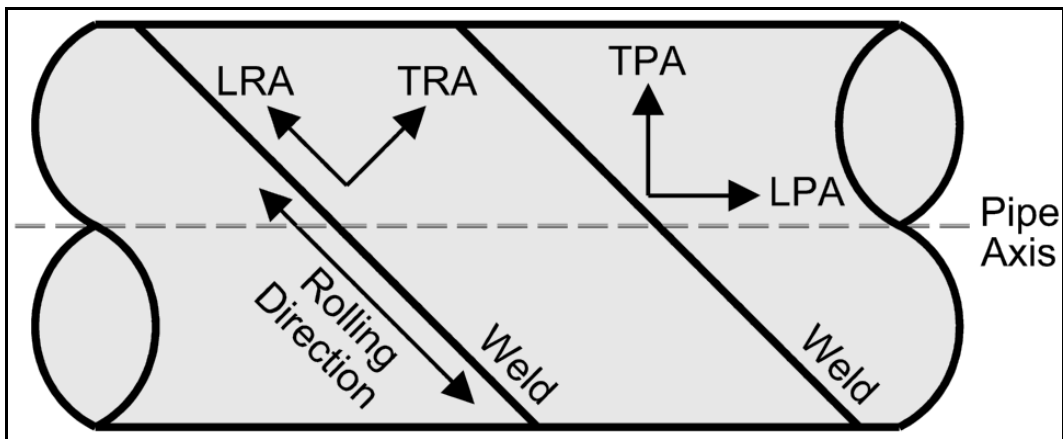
Pipe Specimen Orientations (Adapted from Shehata & Boyd [50])
